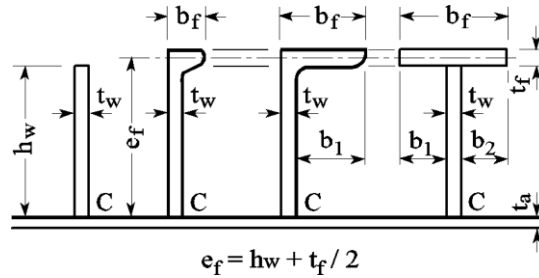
Main dimensions of typical longitudinal stiffeners
